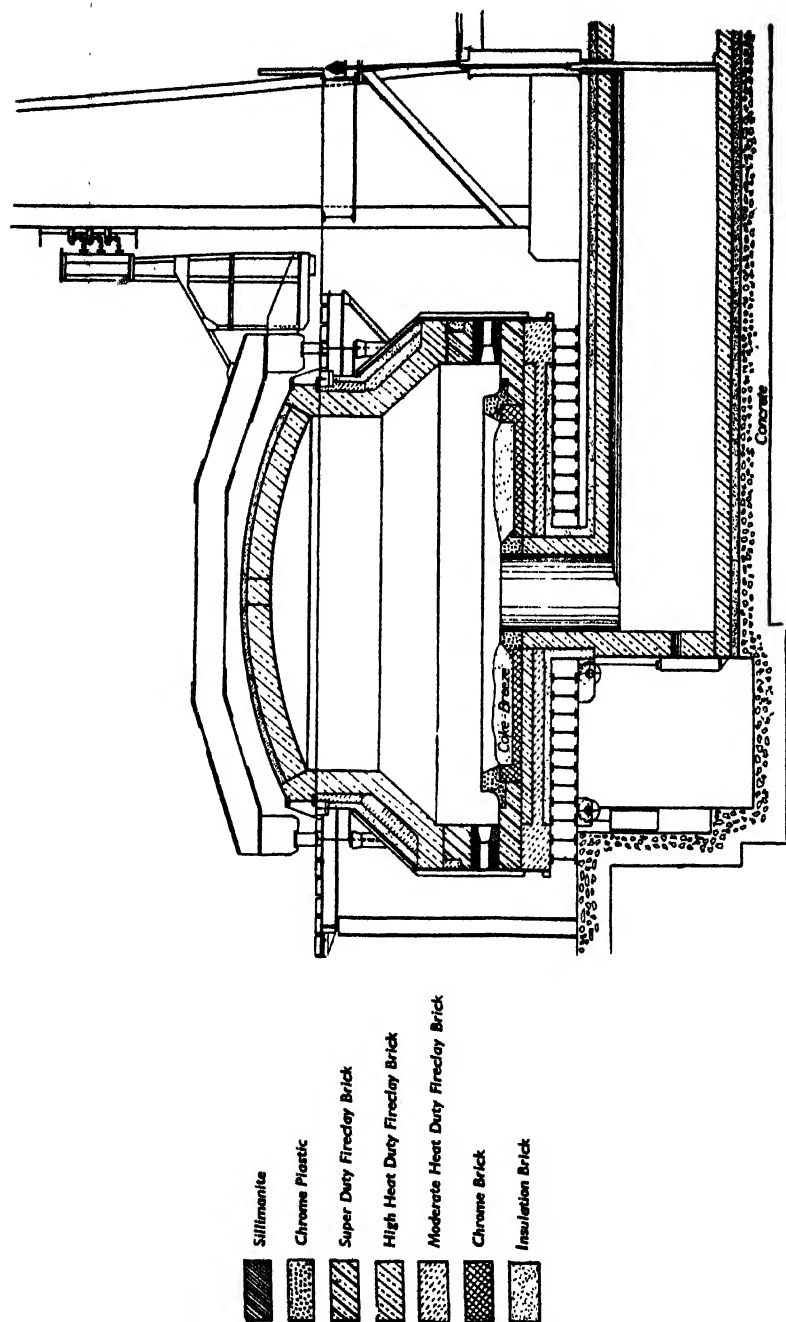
Section through circular soaking pit showing materials used (courtesy Salem Engineering Co. Ltd.).
